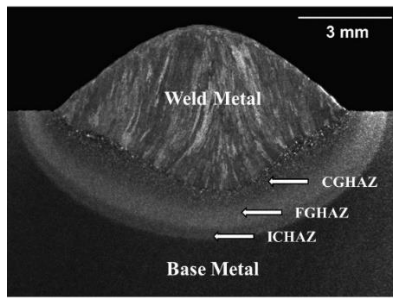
Weld Metal, HAZ Regions and Base Metal in the Bead on Pipe Weld Made at 150 °C.
